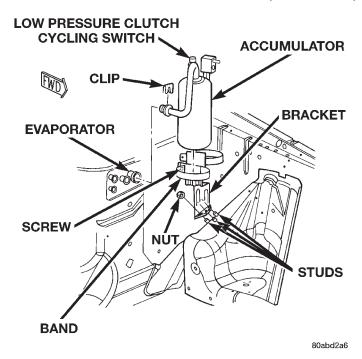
Accumulator Remove/Install - Right-Hand Drive
